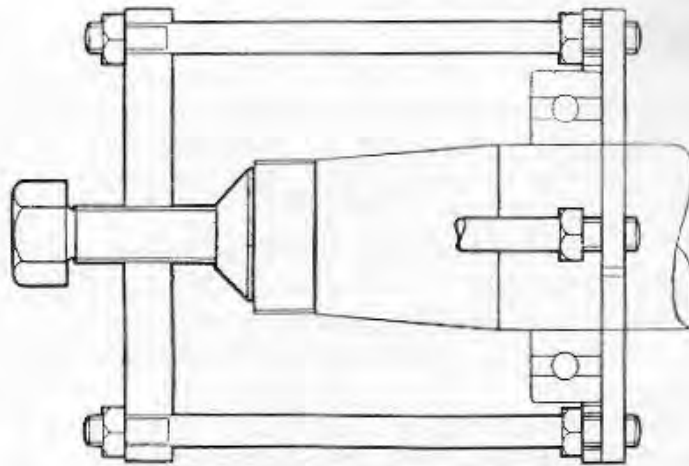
Withdrawing thrust bearings from crankshaft using extractor T1300-93
